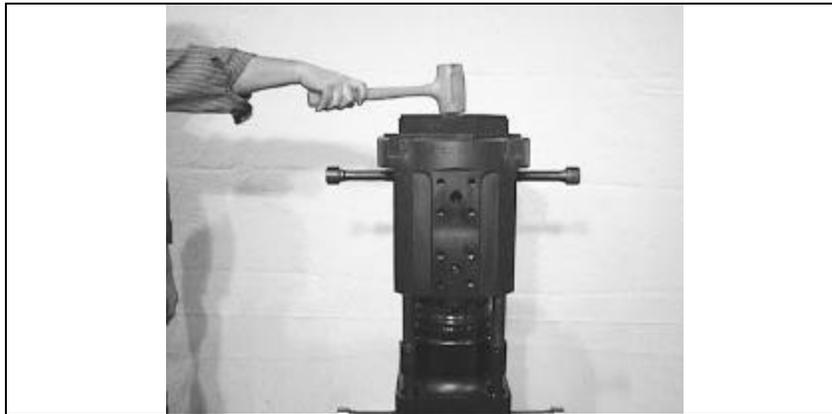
Using a Dead Blow Hammer to Drive Head down
